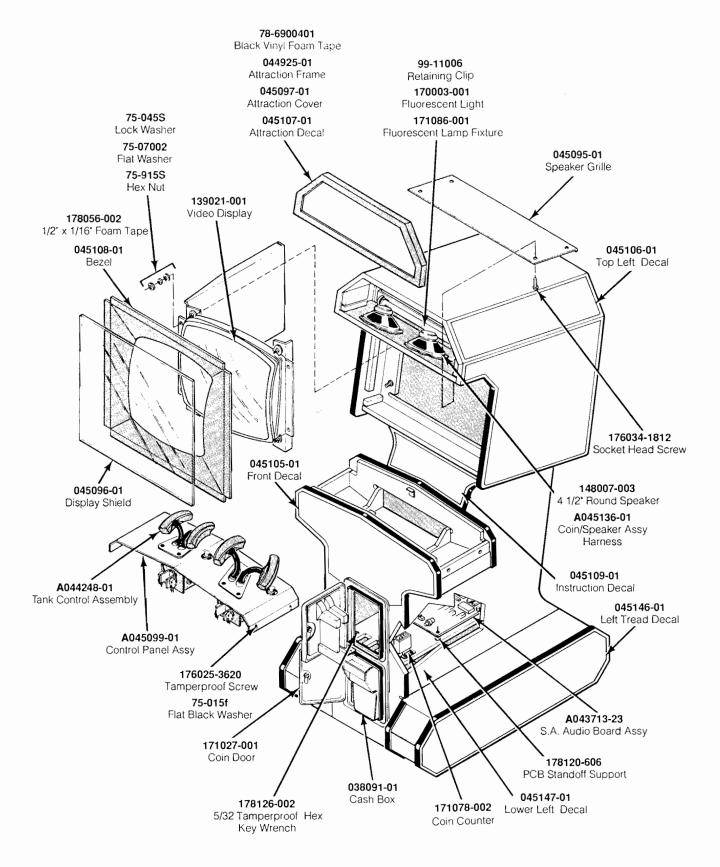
Cabinet Mounted Assemblies A045101-01 A
